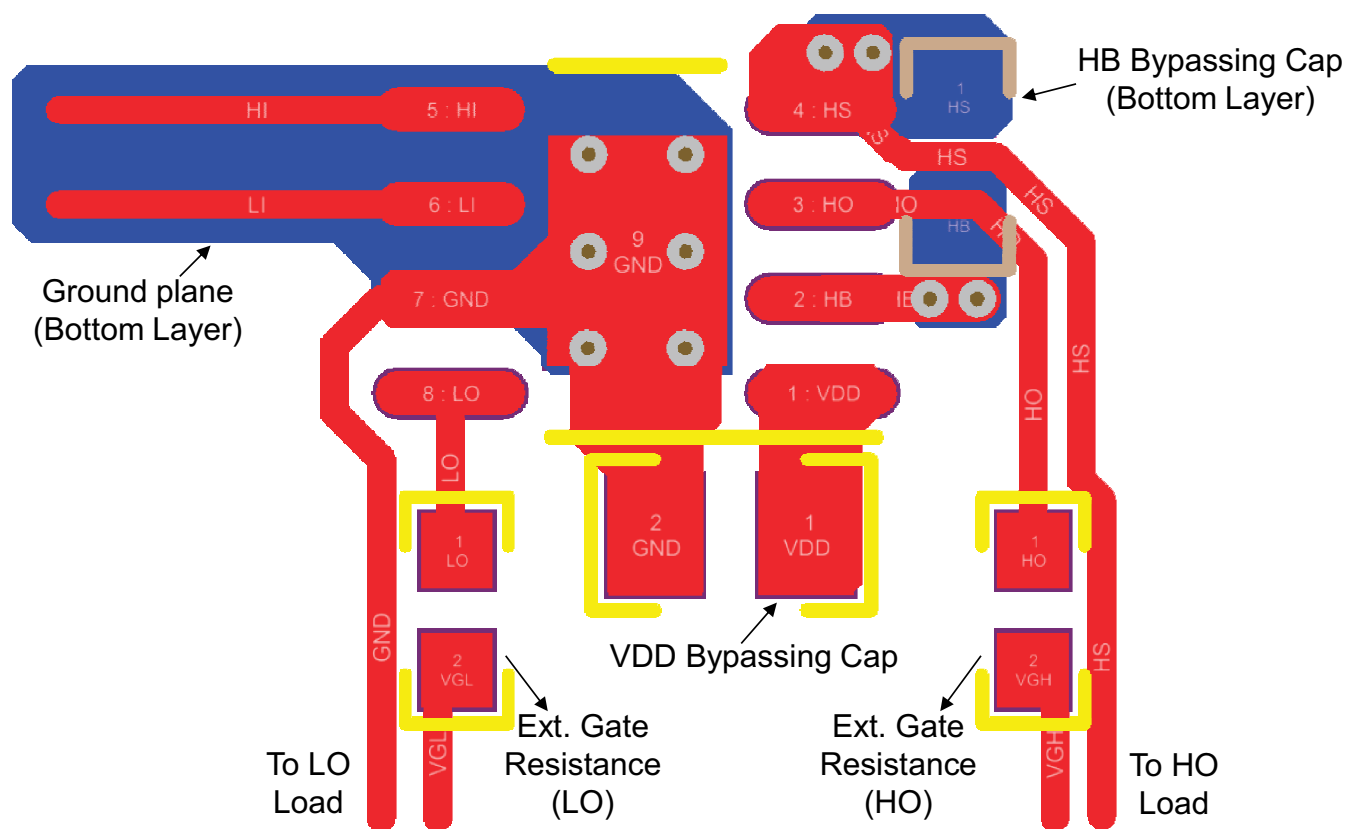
UCC27211A-Q1 PCB Layout Example
